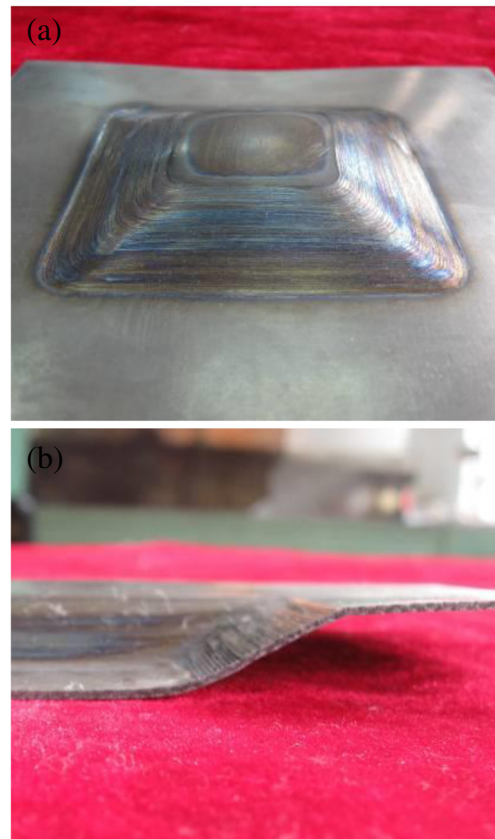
A well-formed workpiece. a External view. b Sectional shape
